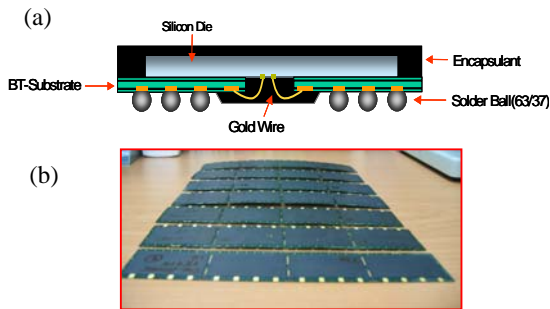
(a) W-CSP BGA package with solder ball, (b) W-CSP BGA strips molded with different EMCs
